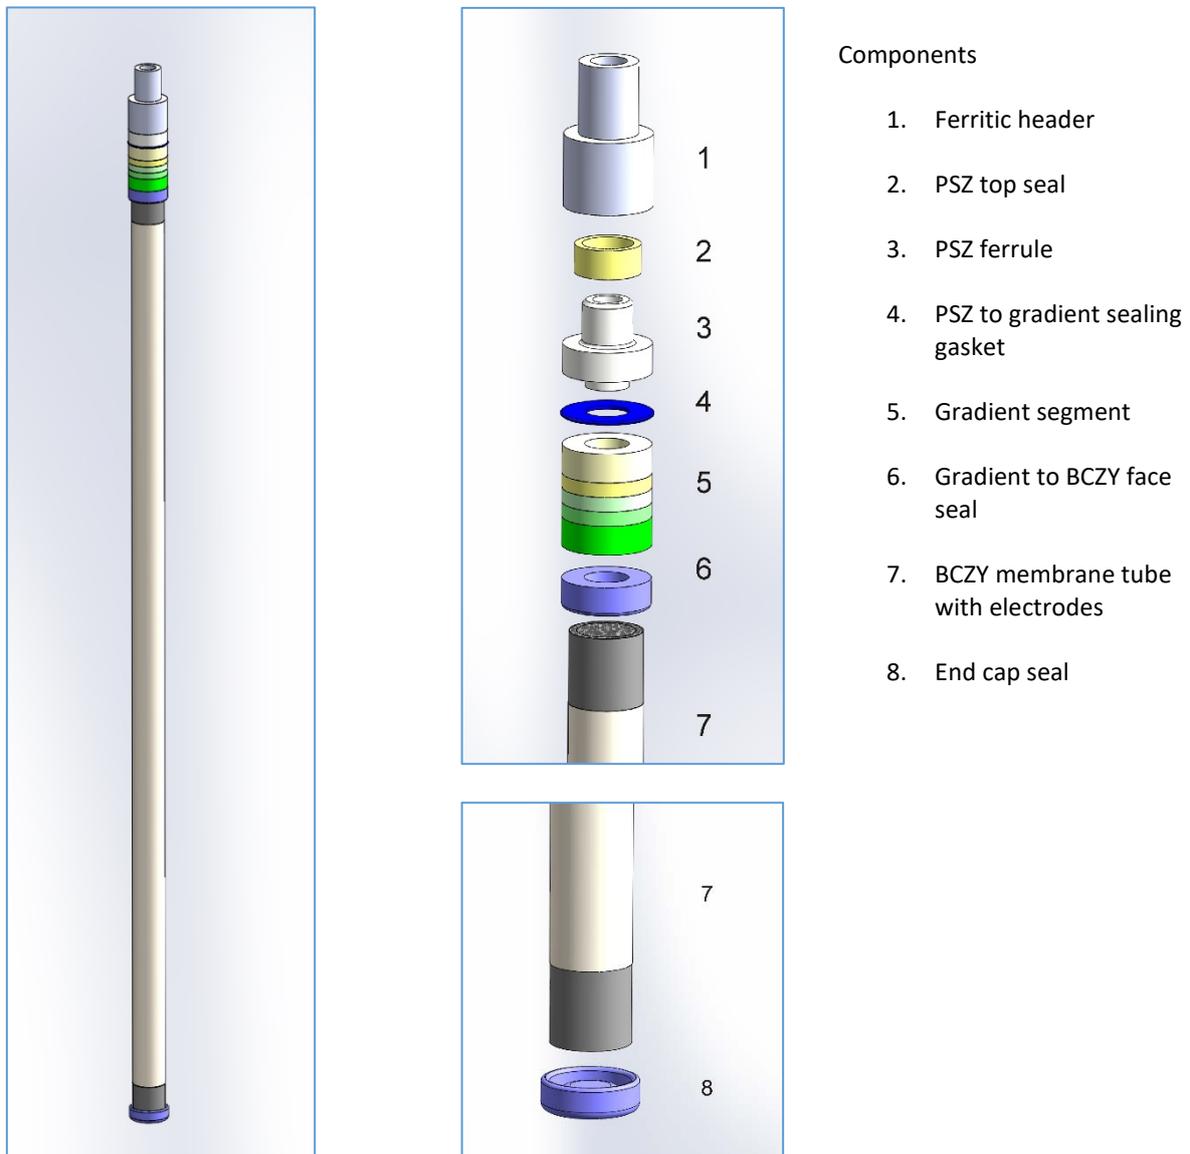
Components which make up 'tube-in-shell' assembly (shell not shown)
